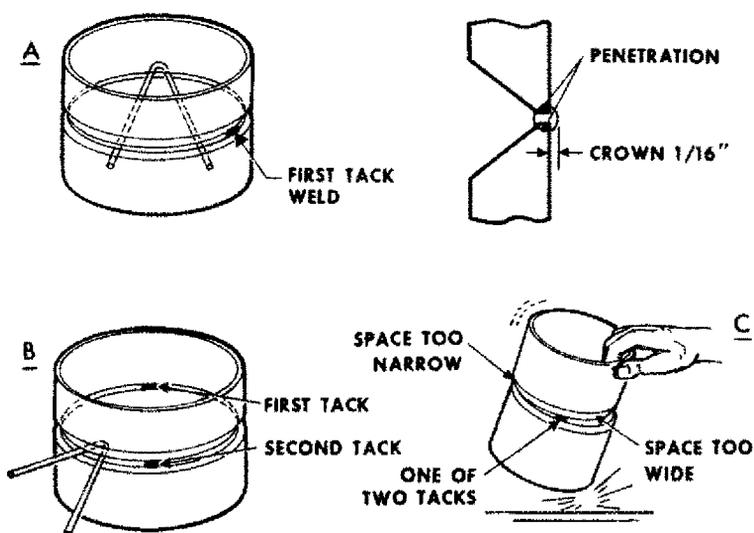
Method of spacing two pipe nipples in preparation for tack welding (a); Correct alignment of pipe nipples in preparation for welding (b); and maximum allowable misalignment (c).
